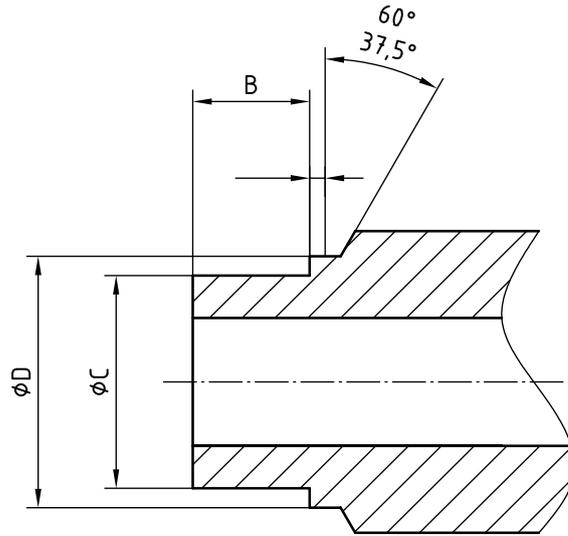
Socket welding end preparation for Class 800 and Class 1 500
